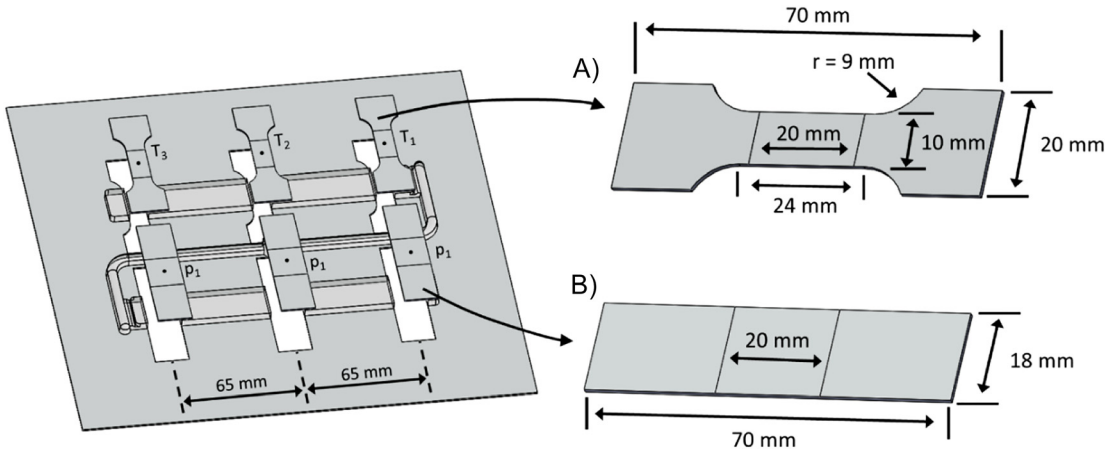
Position of the specimens used for the bending and tensile test with their geometric parameters, A) tensile test specimen, B) bending test specimen.
